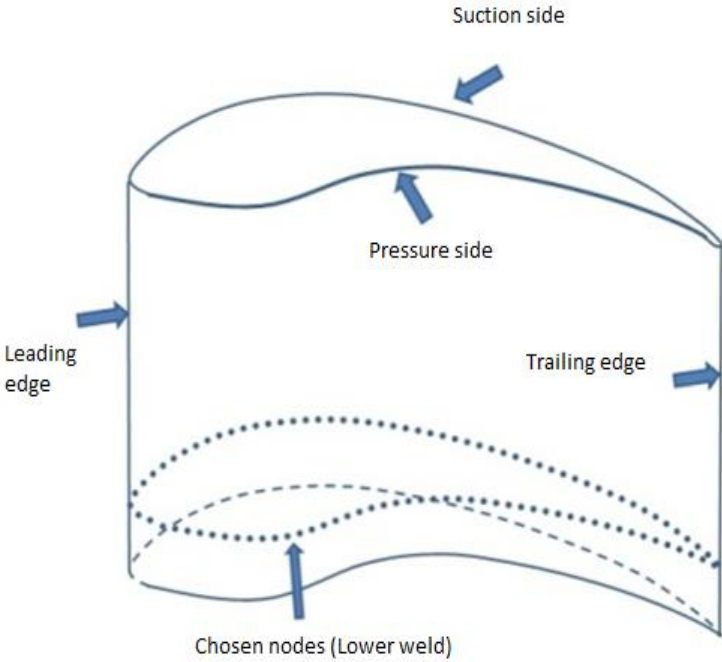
Lower weld edge on one of the 14 struts.
